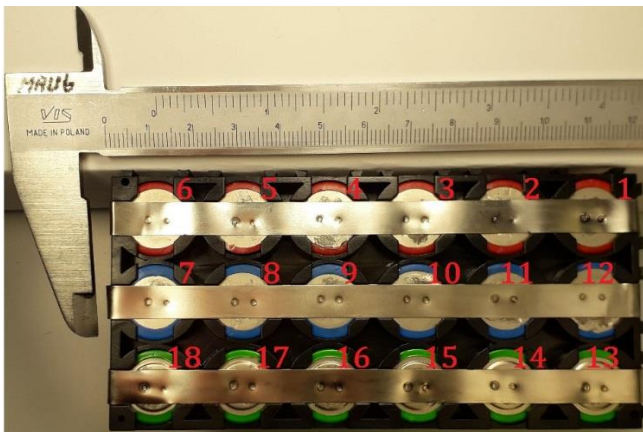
Battery section prepared for visual test of the welds made with an automatic spot welding machine.
